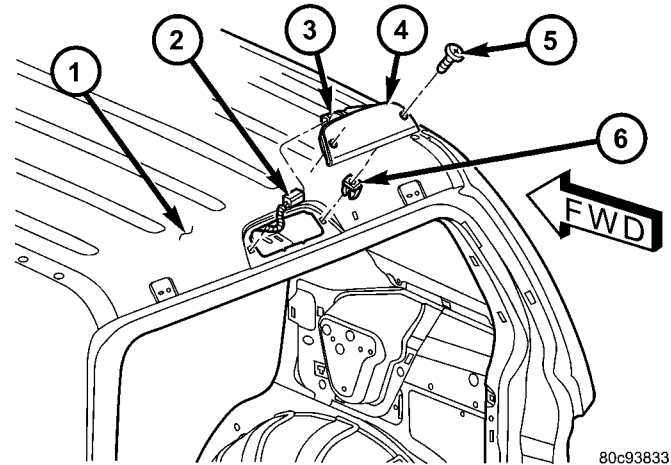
Center High Mounted Stop Lamp Remove/Install
